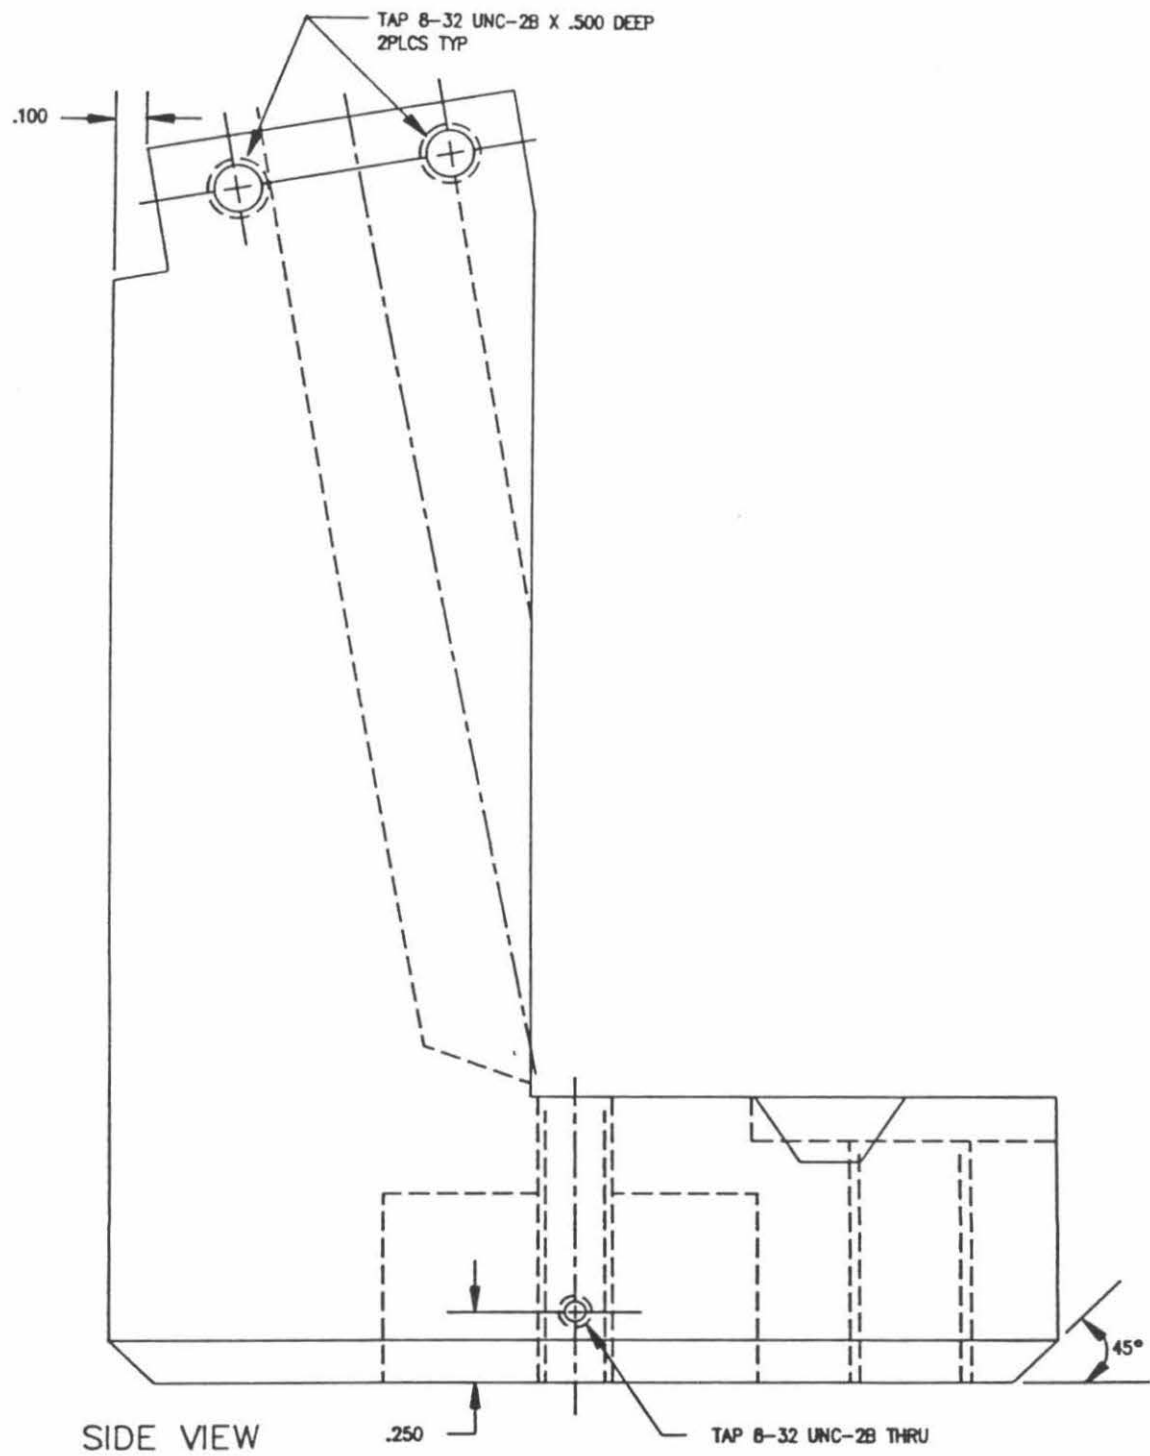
Mechanical drawings of the AFM head (pages 223-227).
